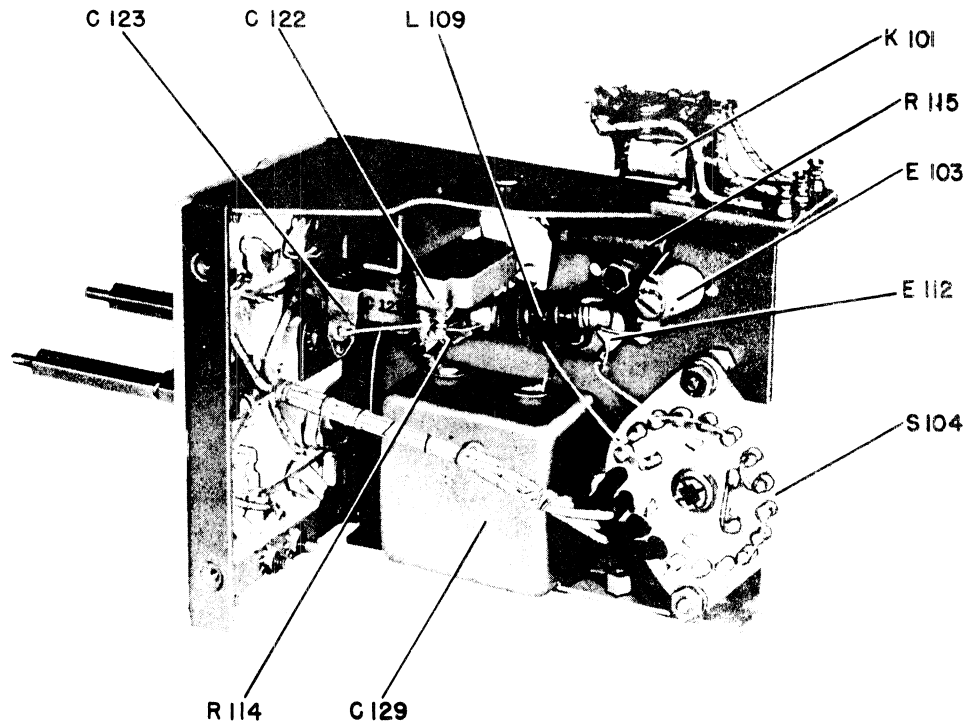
Transmitter Crystal-Bracket Assembly—Bottom View
